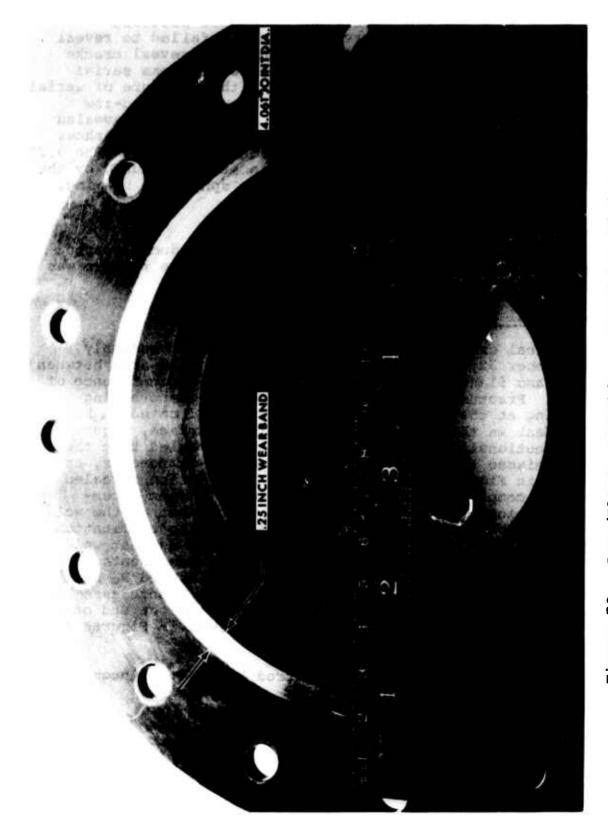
Gear/Flange Assembly - Second-Row Pinion.
